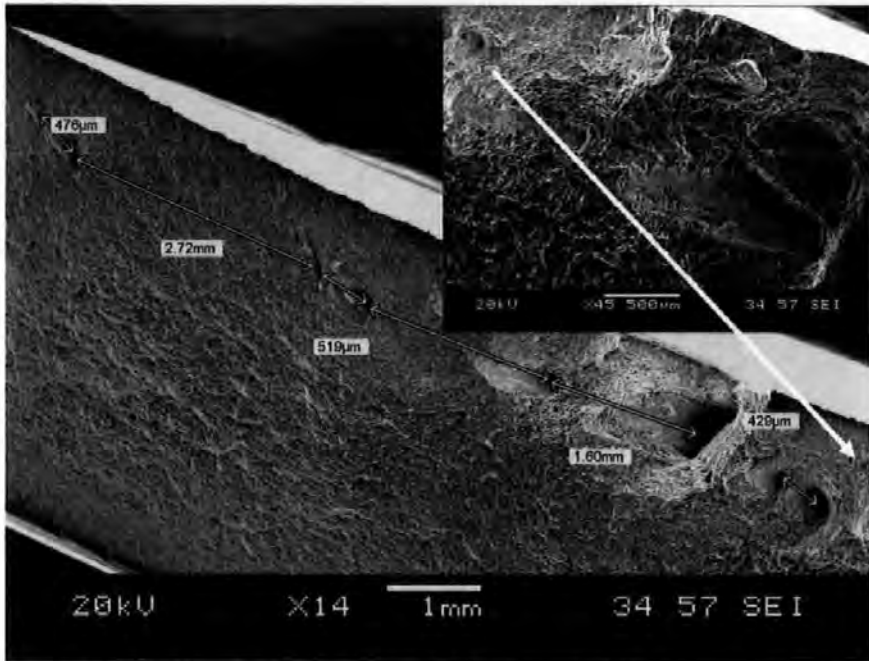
Onion skin defects for weld 8 (85 mm/min, 400 rpm, pitch 0.21).
